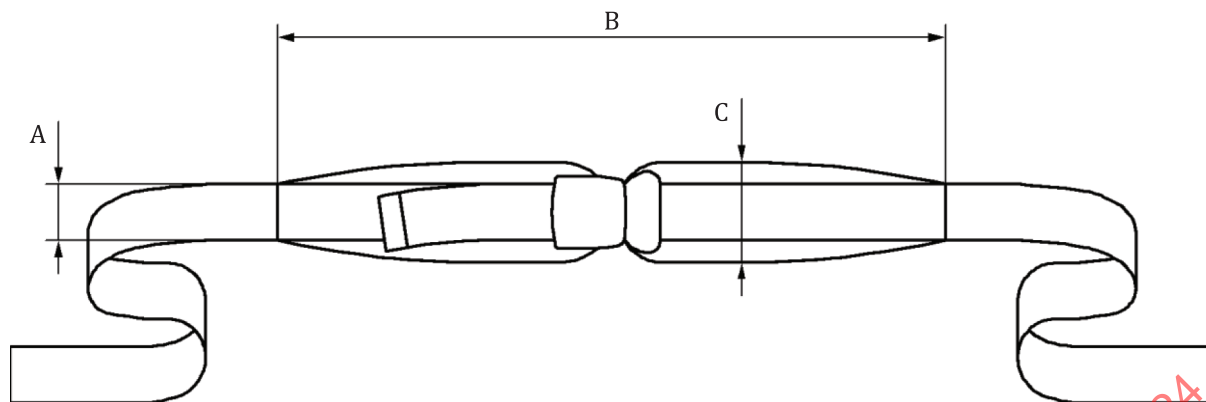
Linear measures of generic support surfaces in the frontal view
